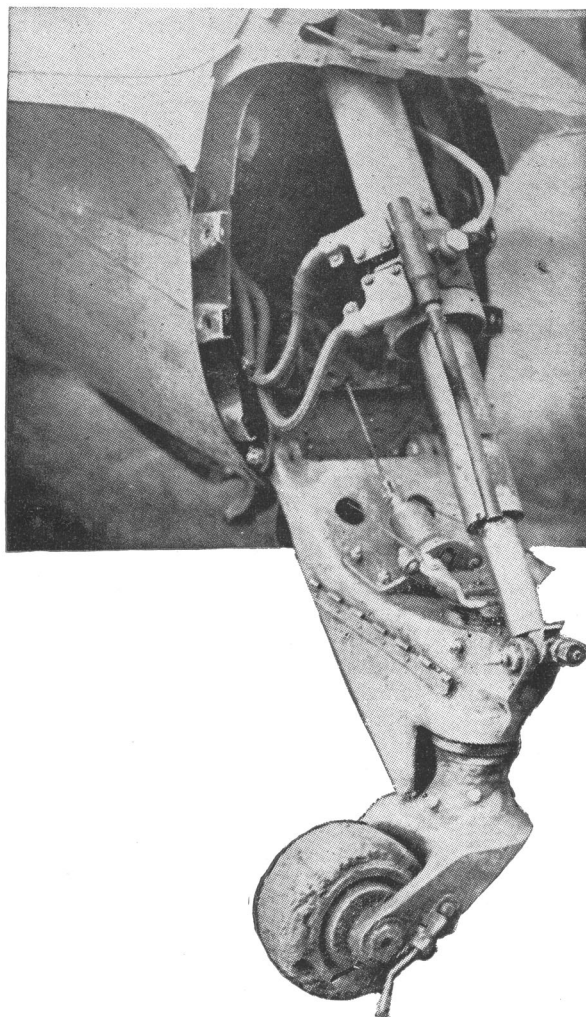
A general view of the tail wheel, with tail cone removed to show castering action of the tail wheel, drag yoke, and combination retracting-shock-strut unit. The tail cone can be quickly removed with a screw driver by removing three quick fasteners, 10 screws, and the piano hinge for attaching the canvas dust catcher on each side.
